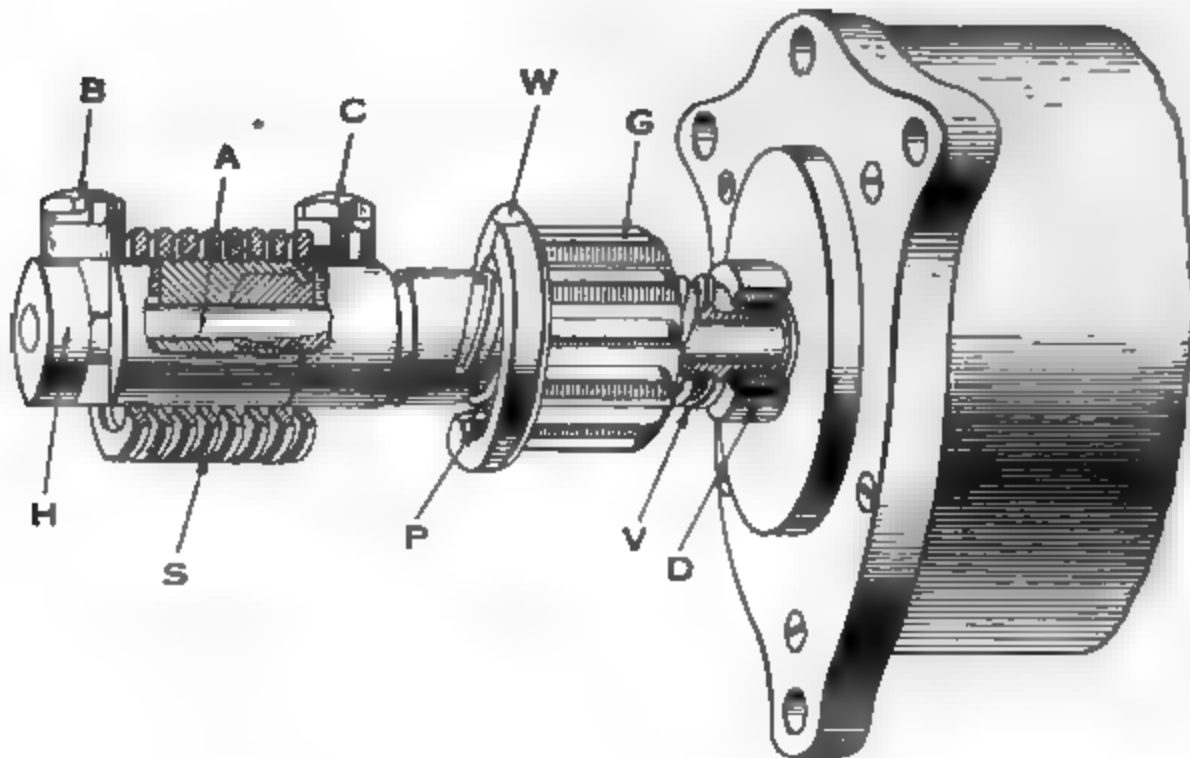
"Inboard" type of Eclipse-Bendix drive.
